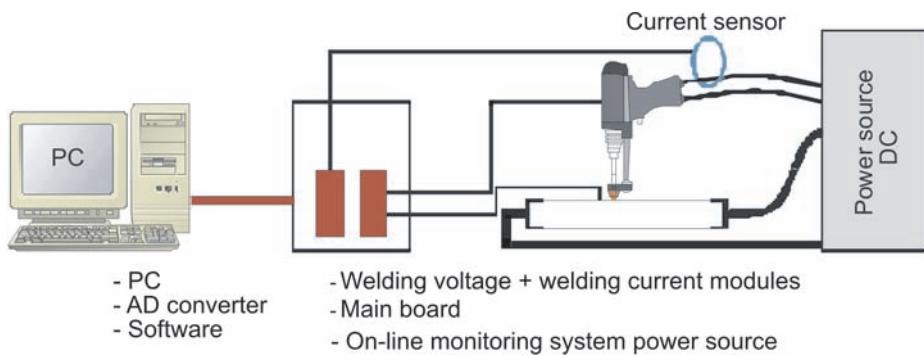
On-line monitoring system scheme for the acquisition of key welding parameters during stud arc welding
